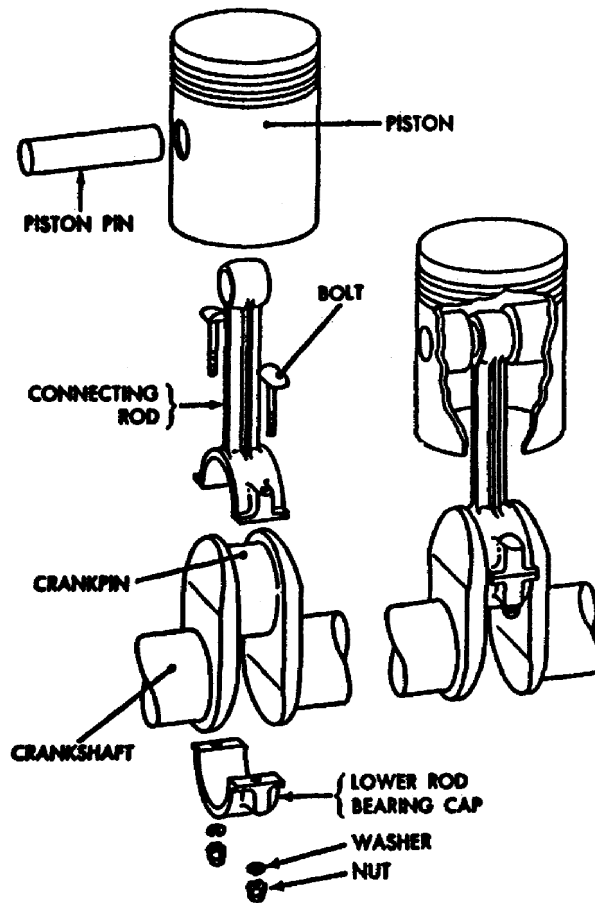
Piston, Connecting Rod, and Piston Pin.
